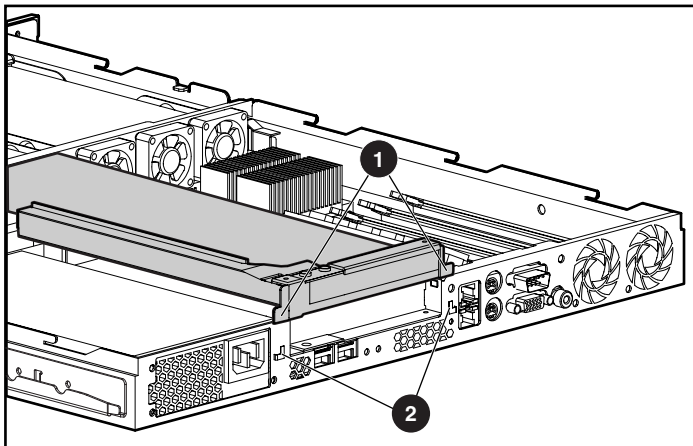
Aligning the rear edge of the PCI riser board assembly with the chassis
